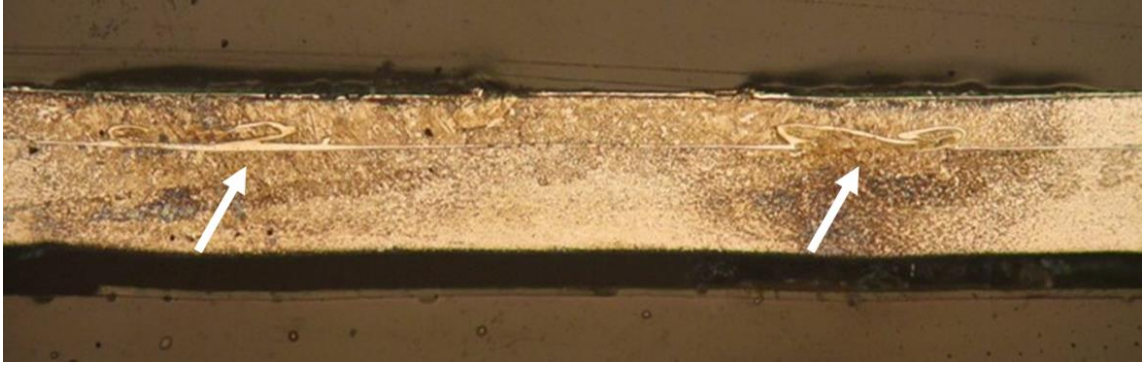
Weld section shows two weld spots made in a single weld pulse. Weld locations are outlined with white arrows. Depending on design and welding parameters, the weld can be fusion, braze, or a solid-state bond.
